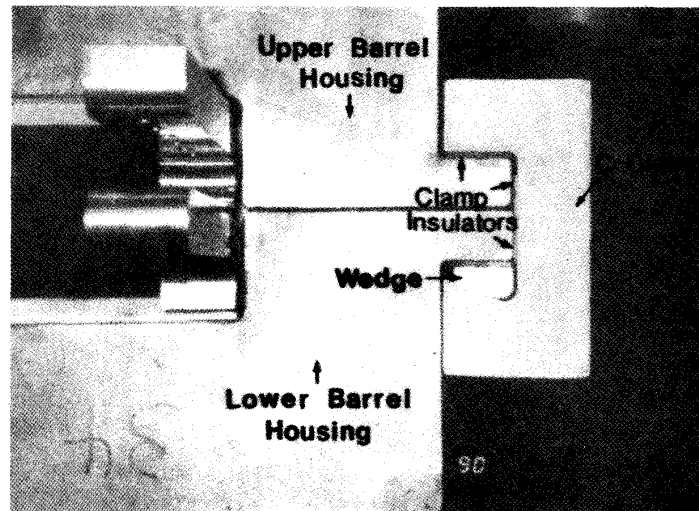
Wedge loaded C-clamps hold the upper and lower barrel housing together.
